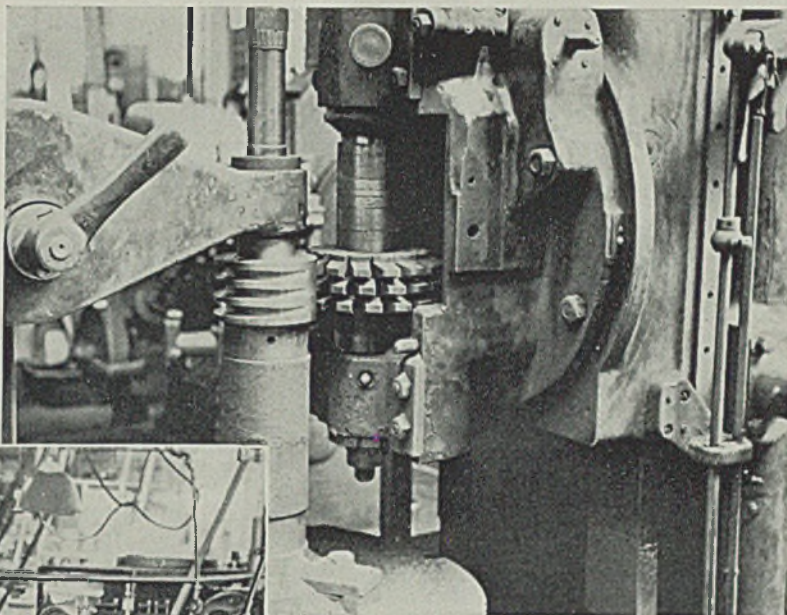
(Below) — Lathe equipped with fixture to accommodate spindle while taper hole is precision ground. Fig. 7 (Right) — Pulleys for V-belt drives are finished on a gear cutter more economically than by turning in a lathe
